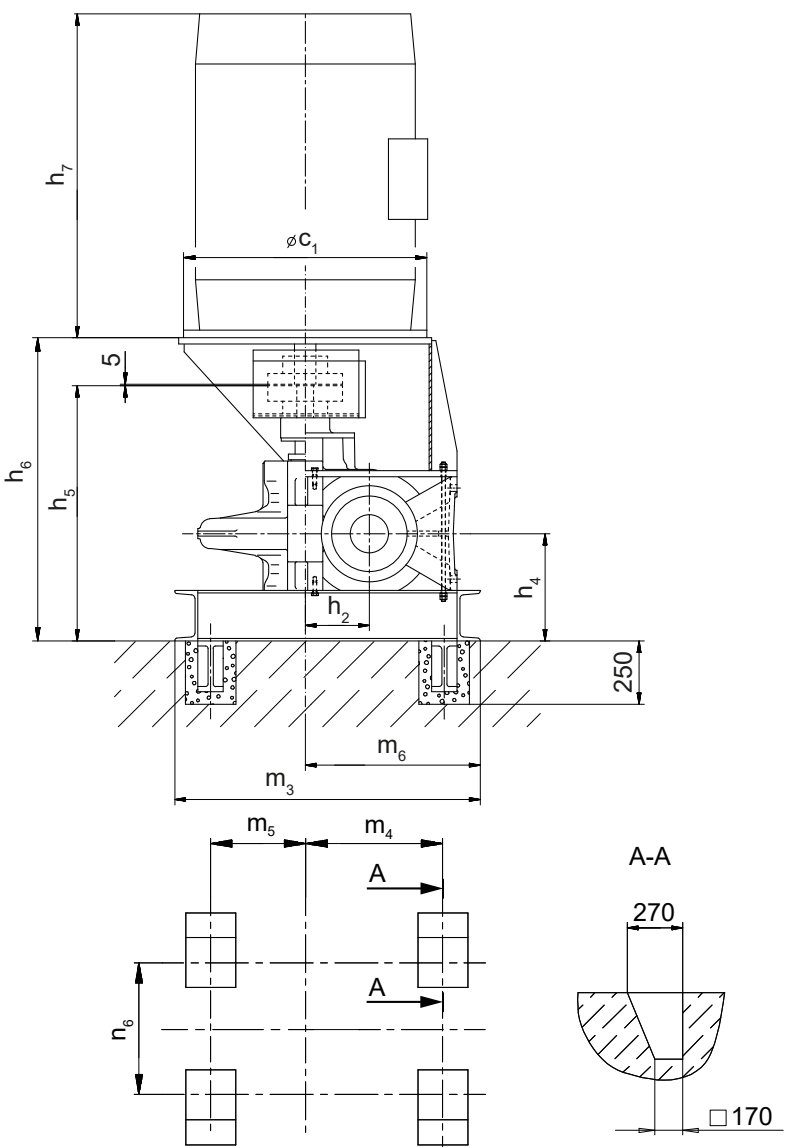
DB installation (4 foundation bolts), dimensions in [mm]
